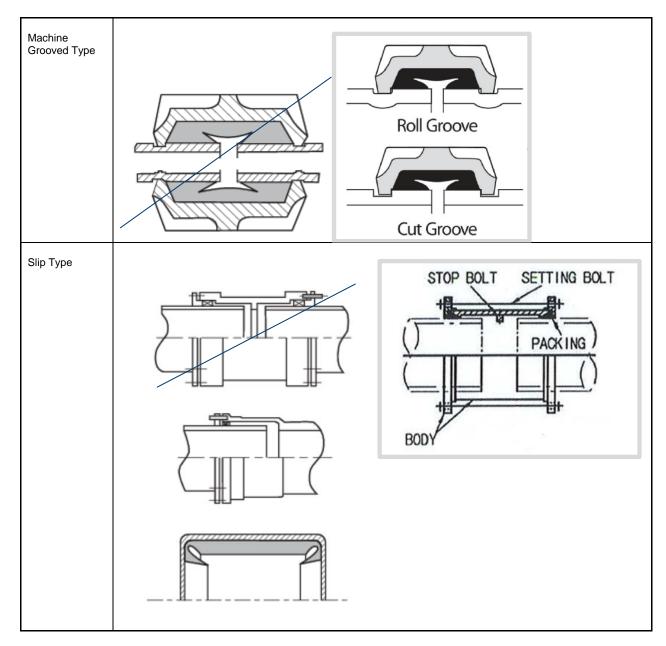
Examples of mechanical joints (Part 2) (Part only shown)
